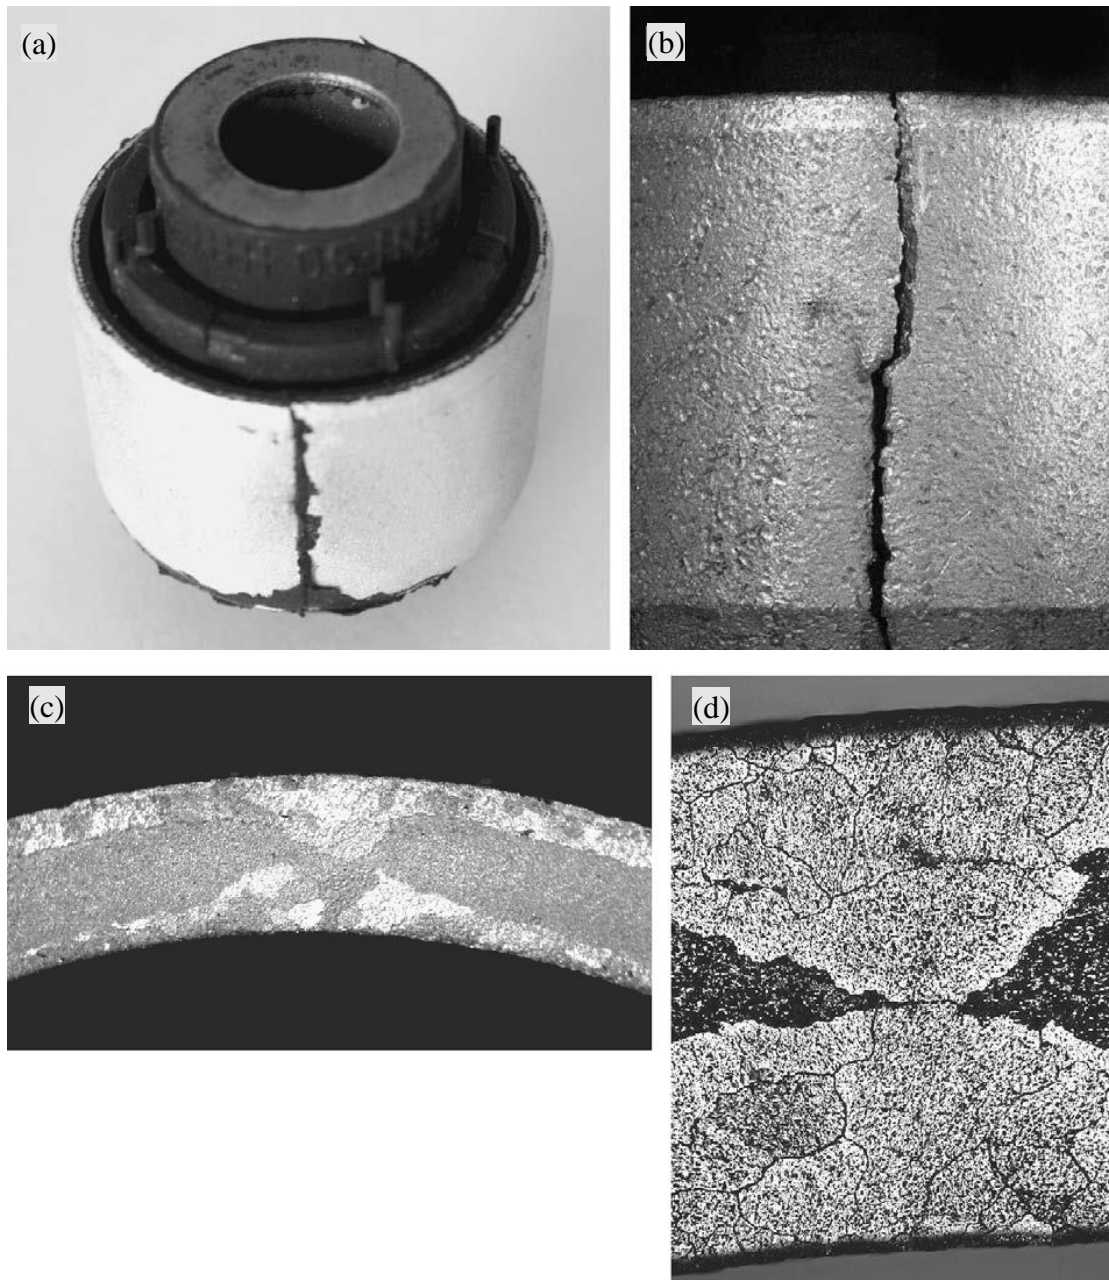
(a) Suspension bushing with a fractured 6005A tube; (b) 6005A tube after cleaning away the rubber that penetrated in between the fracture surfaces; (c) and (d)
